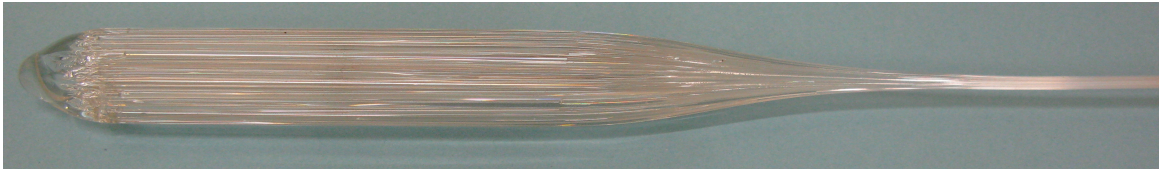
The preform after drawing as much as possible. Around 10-15 cm are lost because the preform holder cannot be lowered into the furnace. The area where the glass is molten and extruded is nicely visible as the cone shaped part between the large and the small diameter
